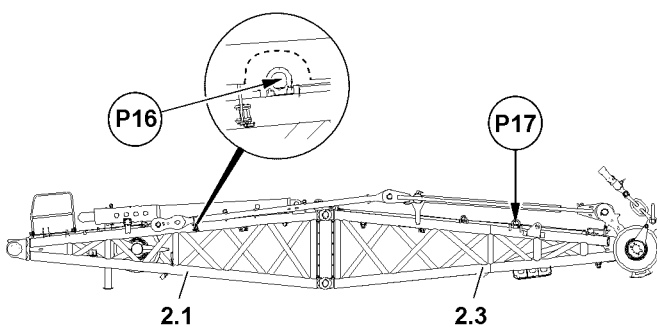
Fastening points for WA-frame 2 completely installed, short version
